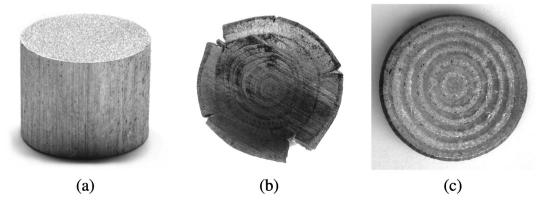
Compression test specimens; (a) before testing (outside diameter = 12.7 mm), (b) after testing on an ambient extruded sample, and (c) after testing on an evacuated extruded sample.
